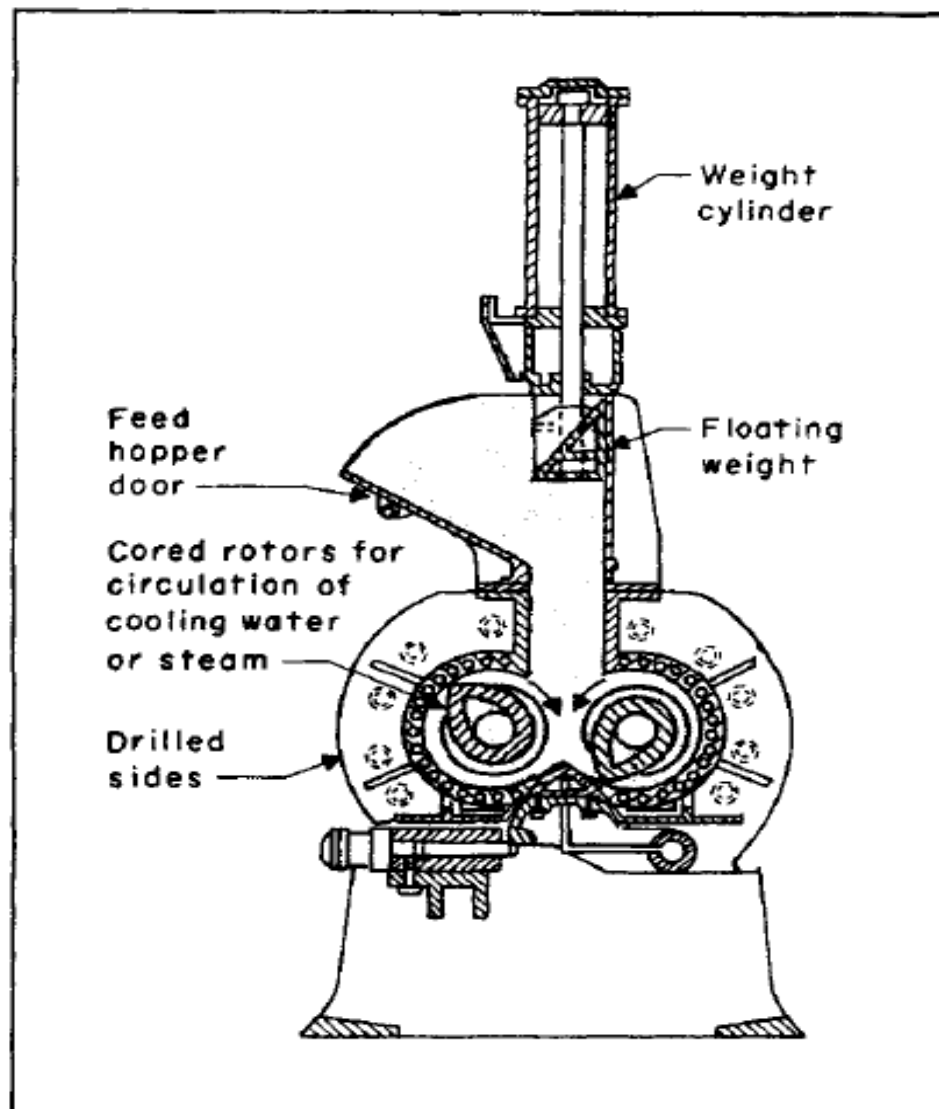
Fig. A. Rotors within cylindrical chambers deform material in the tight clearances between the rotor blade tips and the chamber walls. Rotated at fairly high speeds, the blades provide kneading, shearing, smearing, pulling, and compressing action. Cored rotors provide channels for cooling water or steam. The batch is held confined by a ram in the feeding neck.
